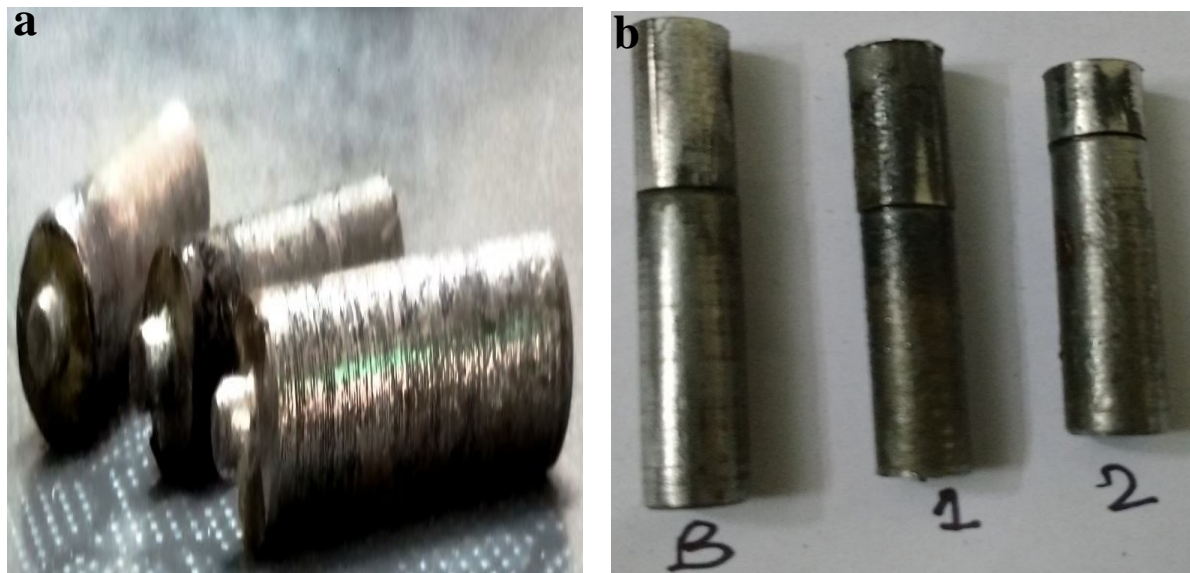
Figure representing (a) Mild Steel Dummy pins (b) Mounting of Wear Samples
